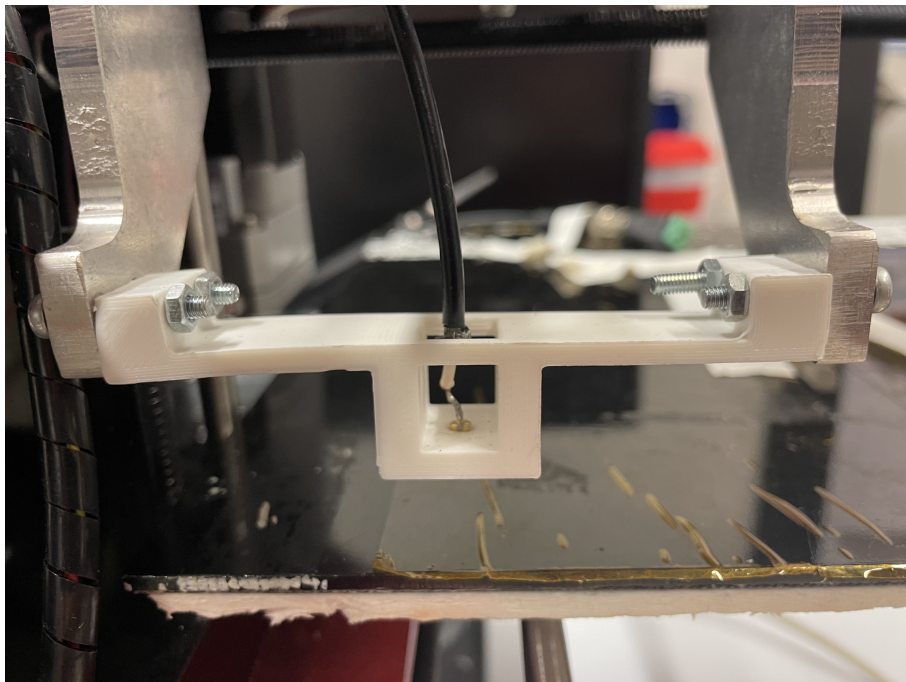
The Probe Holder Mounted on the Flexionstein
